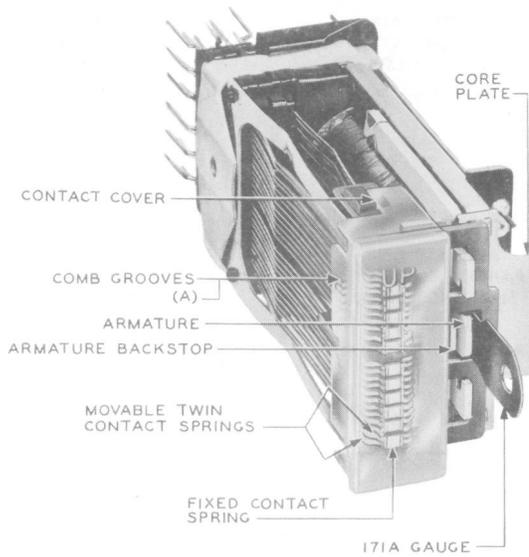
Method of Inserting Gauge In AL-Type Relay
